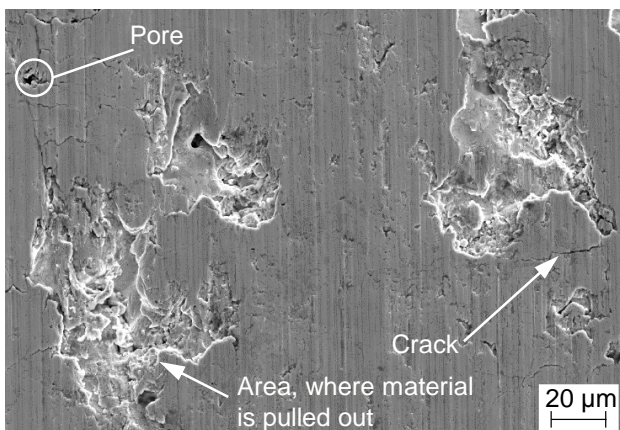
Machined surface ($v_c = 200$ m/min) with opened pores, cracks and areas, where the material is pulled out
